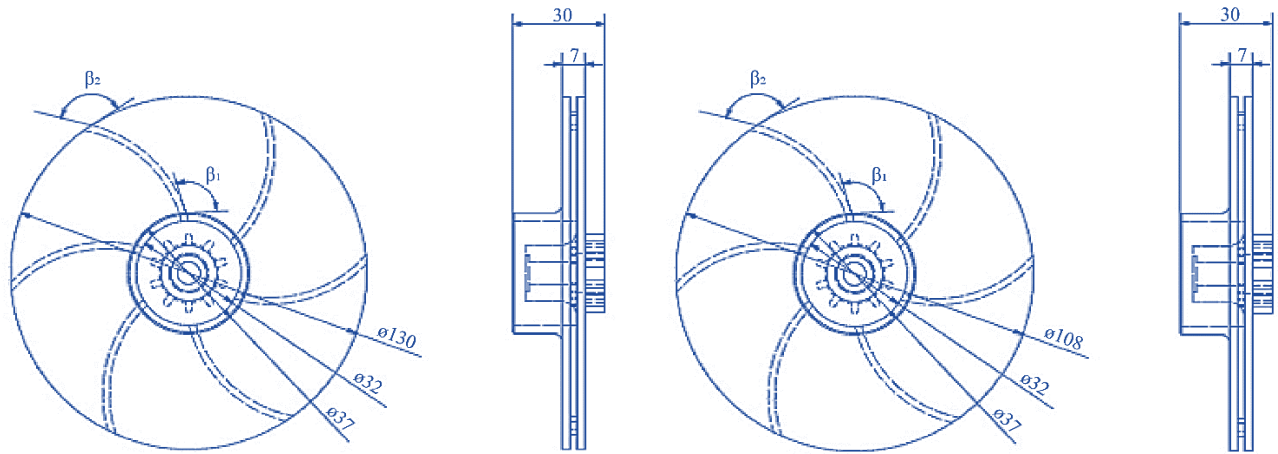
Dimensions of the original impeller and the trimmed impeller (units in mm)
